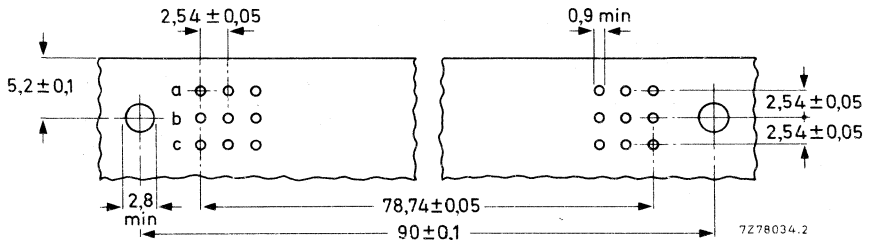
Hole pattern of the board for a female part with 3 x 32 contacts (style C): for 2 x 32 contacts (style B) the holes of row c are omitted.
